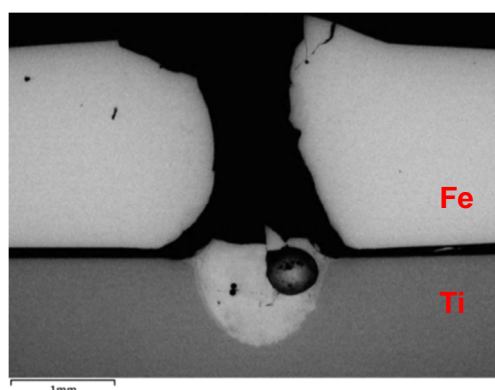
Loss of weld profile due to high brittleness and cracking occurred during welding, cutting and handling of the sample.
